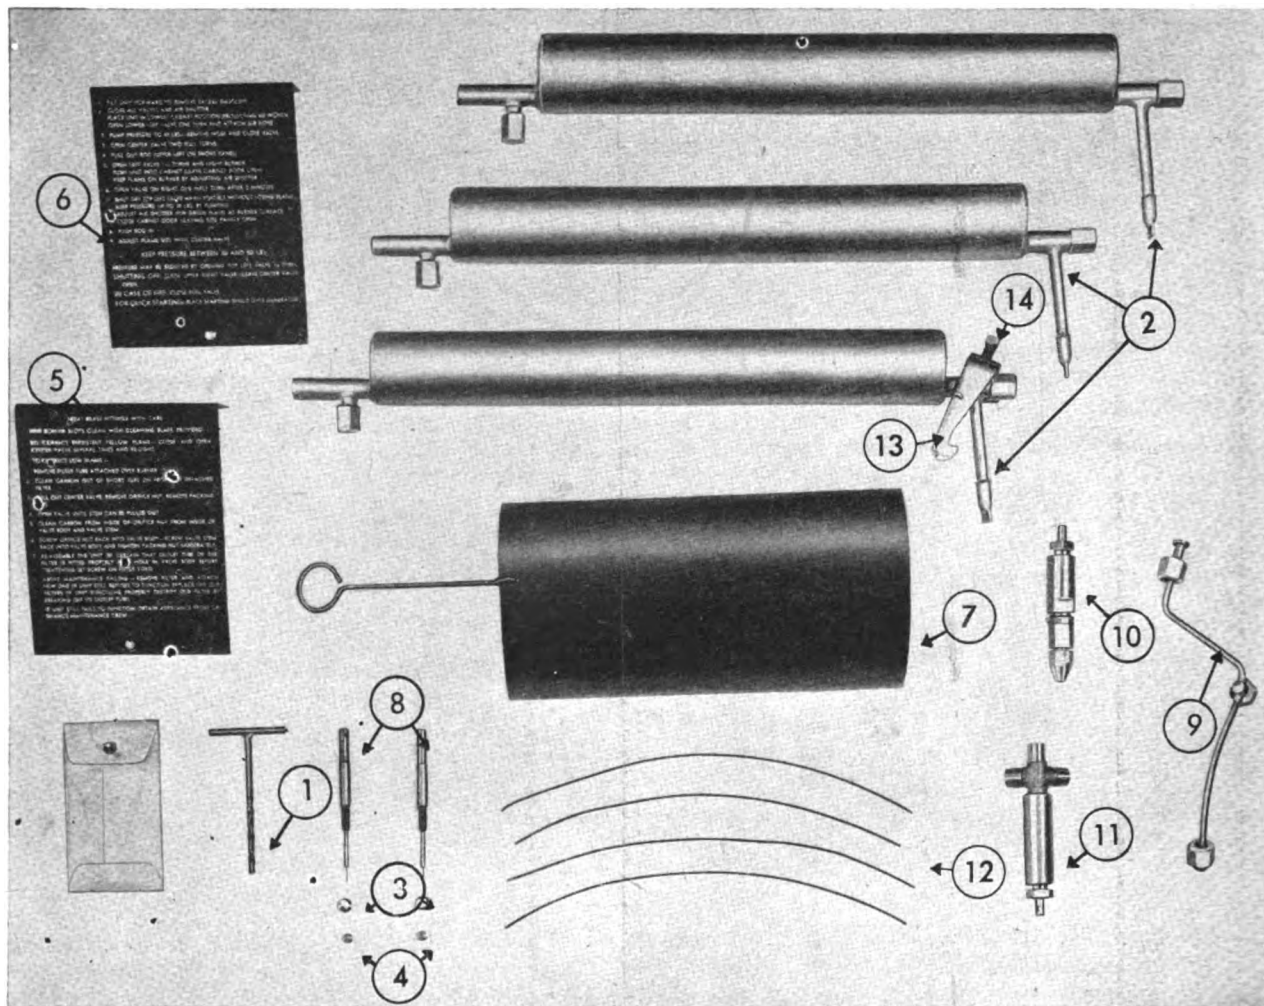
Components of set, conversion, No. 2 (simplified) (65-J-2377).
